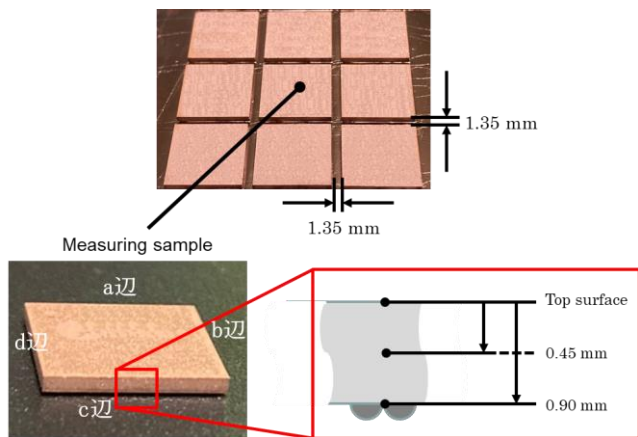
Sample setting layout during Cu sputtering and measurement position of the sample.
